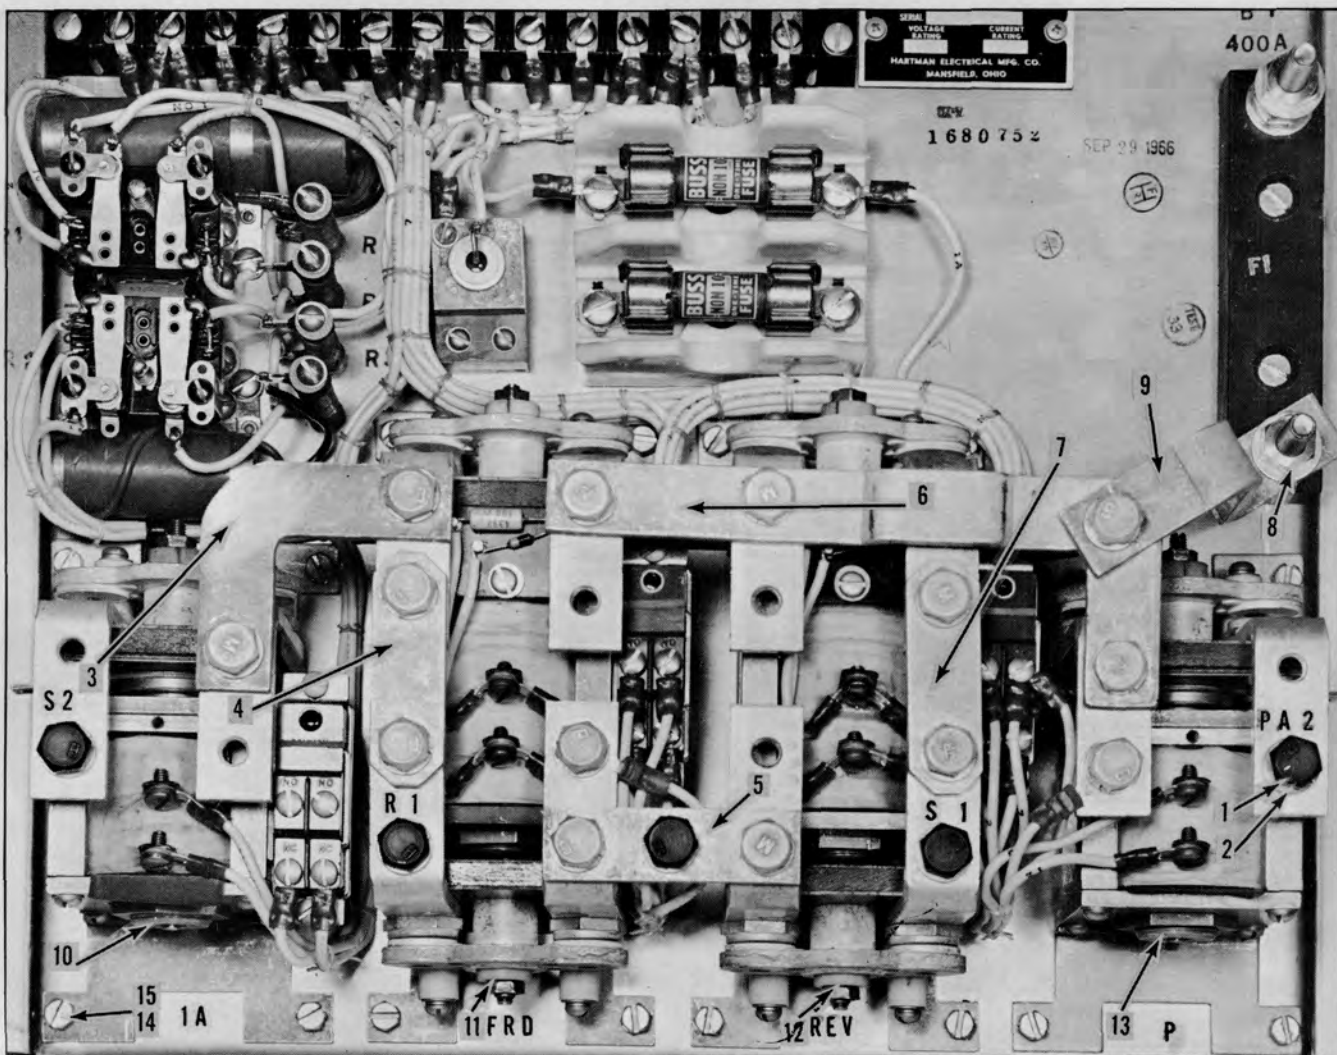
Hartman Panel (Disassembly and Reassembly)
